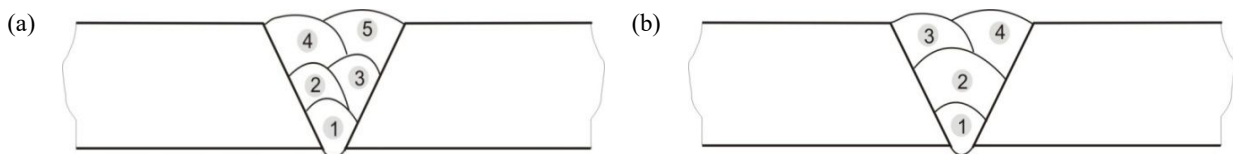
Cross sections of seam order in: (a) manual metal arc welding, (b) metal active gas welding
